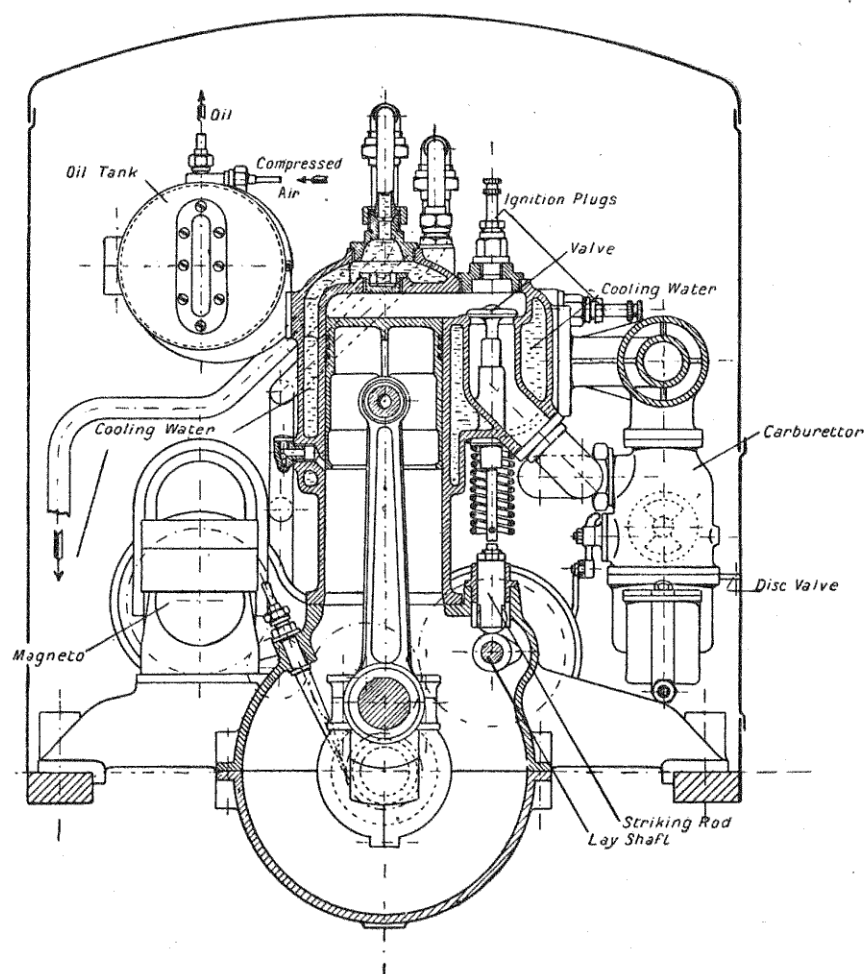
“Sleipner” boat engine (section through cylinder).
